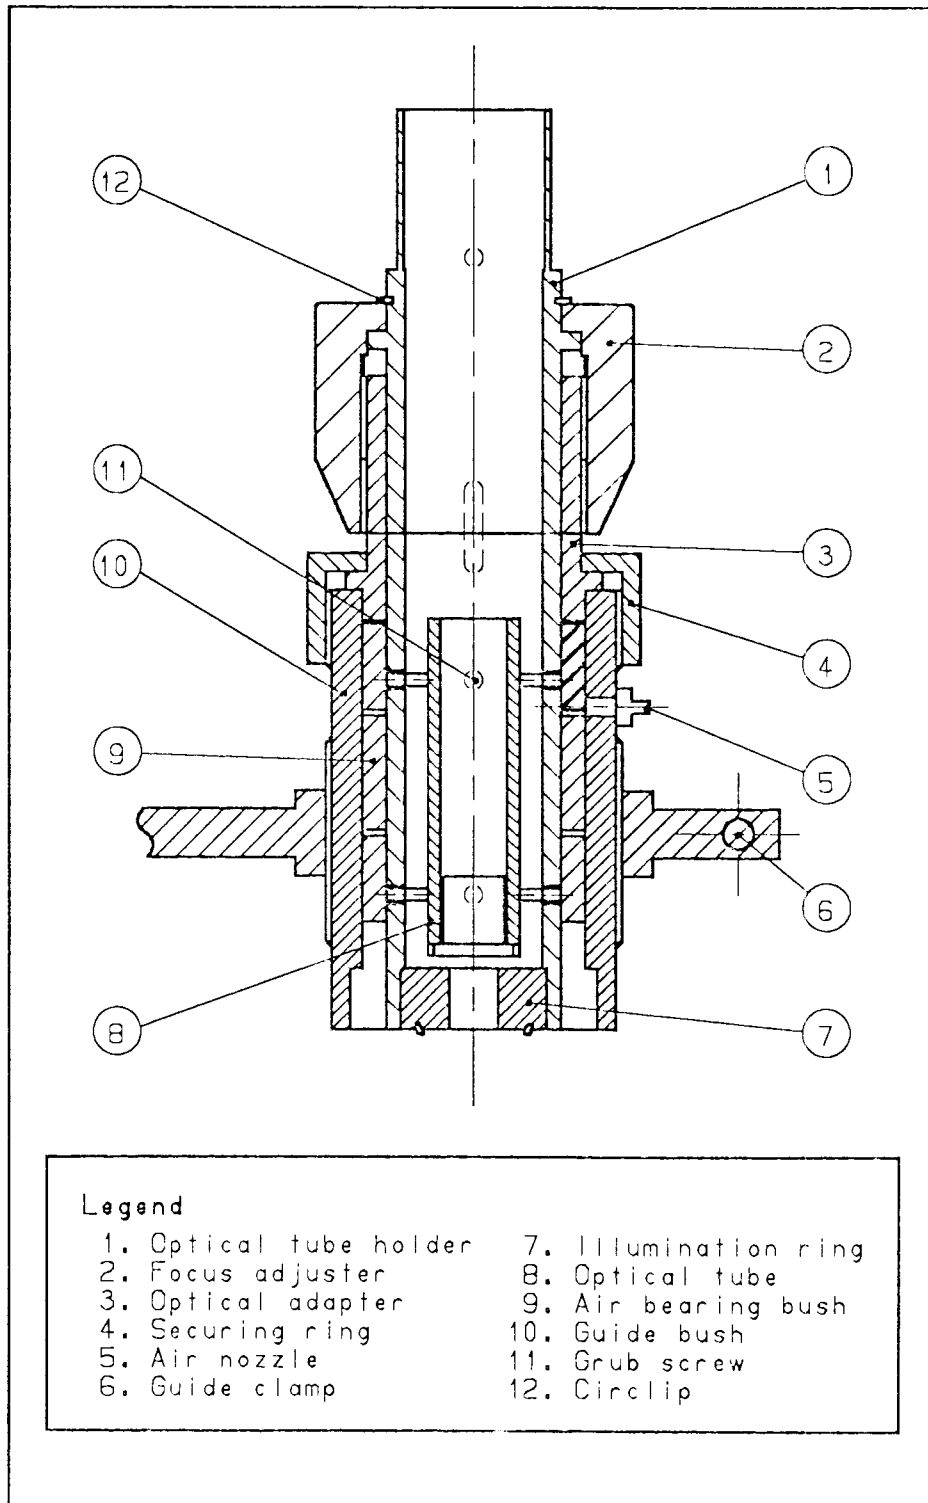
Assembly drawing of the optical unit (but without the removable Vickers hardness type eyepiece).
